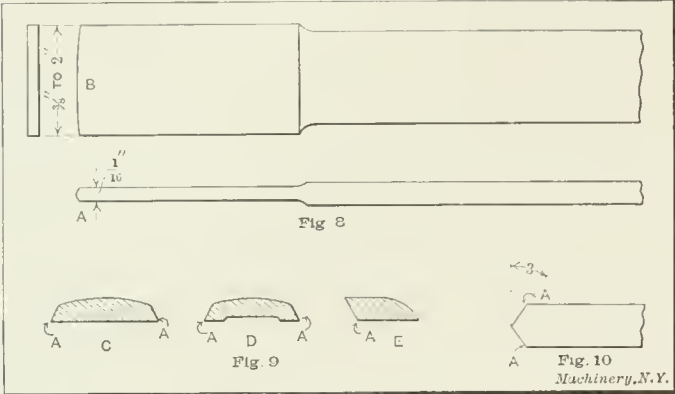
, 9 and 10. General Appearance, Sections and Enlarged View of End of Hand Scrapers
